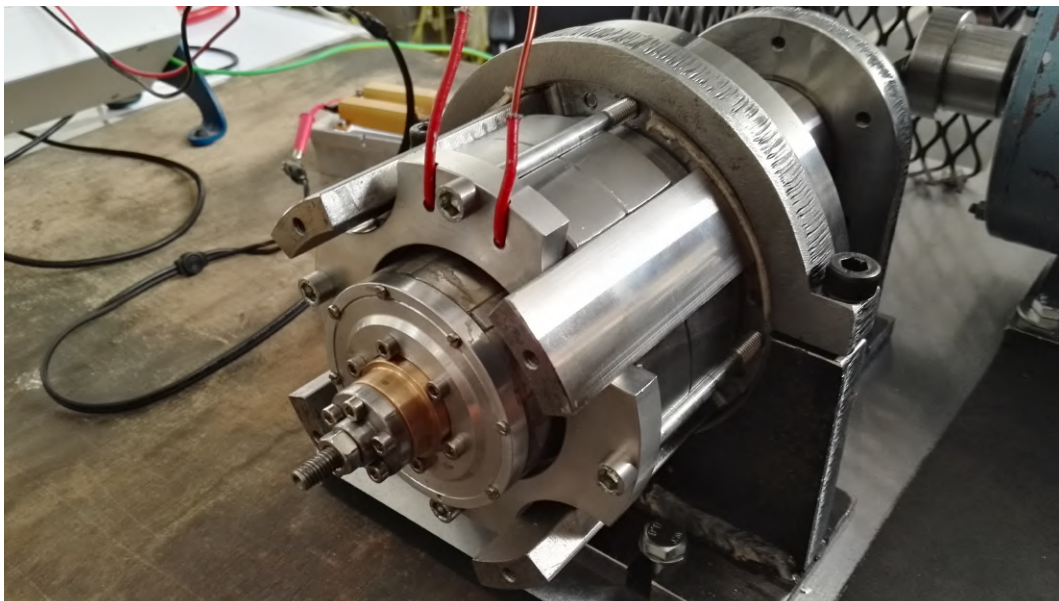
Photograph showing the back view of the power piston and magnet train assembly, as assembled to the linear reciprocator
